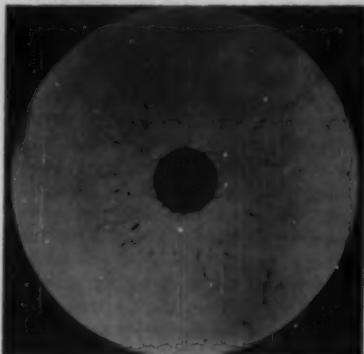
Cross-section of mild steel cylinder showing fractures resulting from internal loading (1-in. I.D., 4-in. wall).
